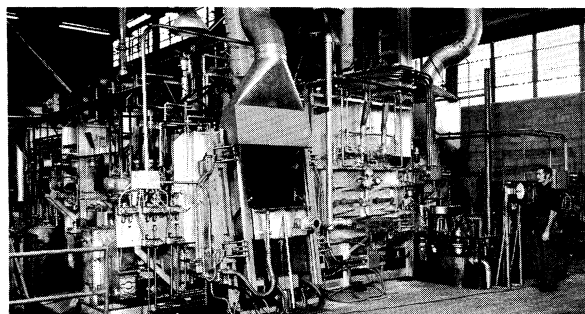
A continuous gas carburizing furnace with alternate side flow feed for marquenching or press quenching.
